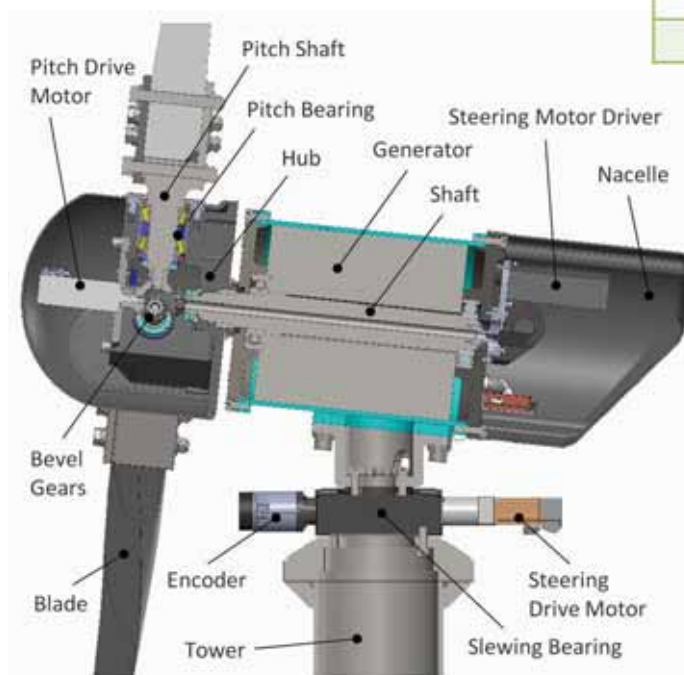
The sectional drawing of scaled floating wind turbine mechanism
